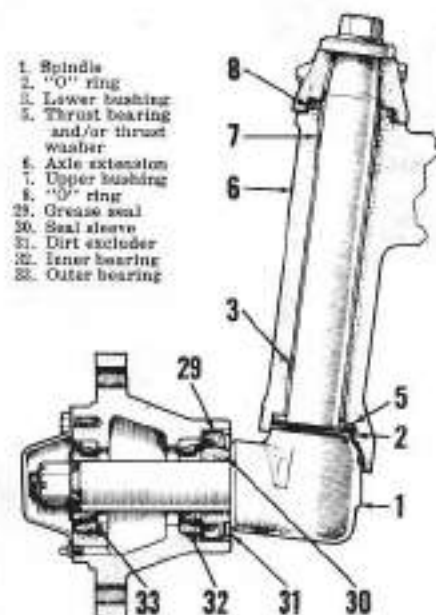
Cross-sectional view of typical front wheel spindle, hub and bearing assembly. Note that lip of seal (29) is installed out (away from inner bearing).
